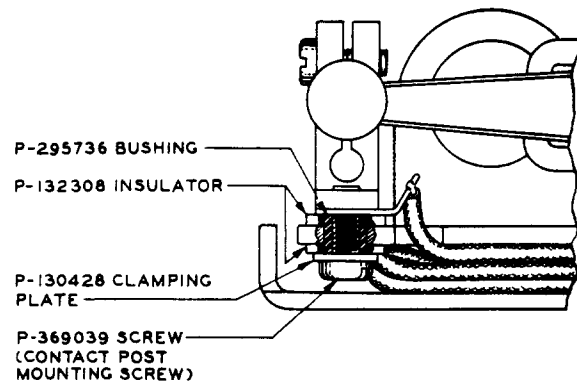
Contact Post Mounting Parts — 267-type, D-99739, and D-175787 Relays
